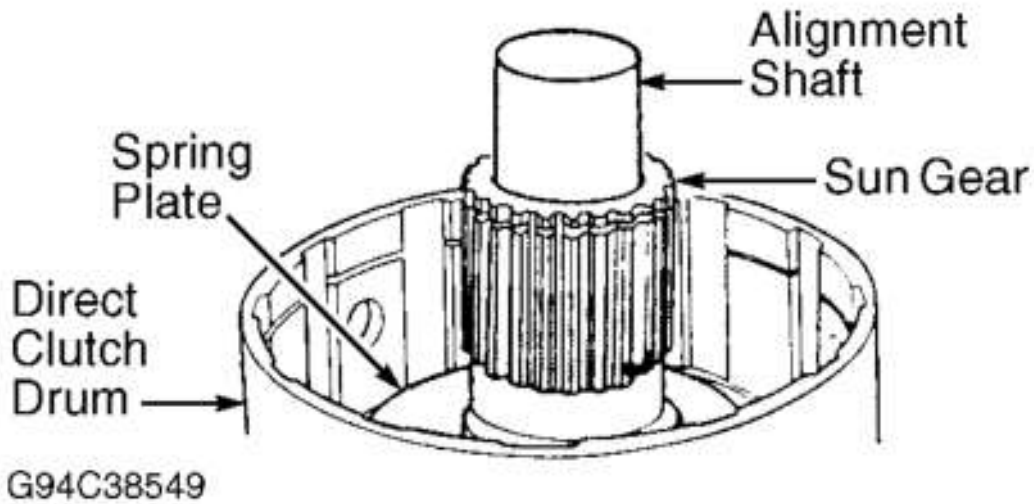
Aligning Planetary Gear & Overrunning Clutch Hub Splines
